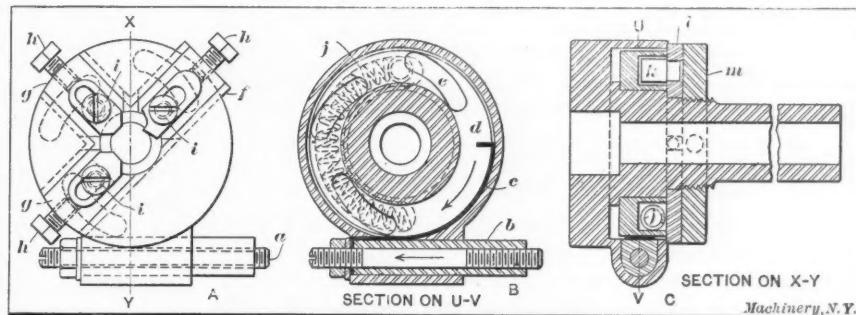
Details of Taper Turning Tool shown in Fig. 16
